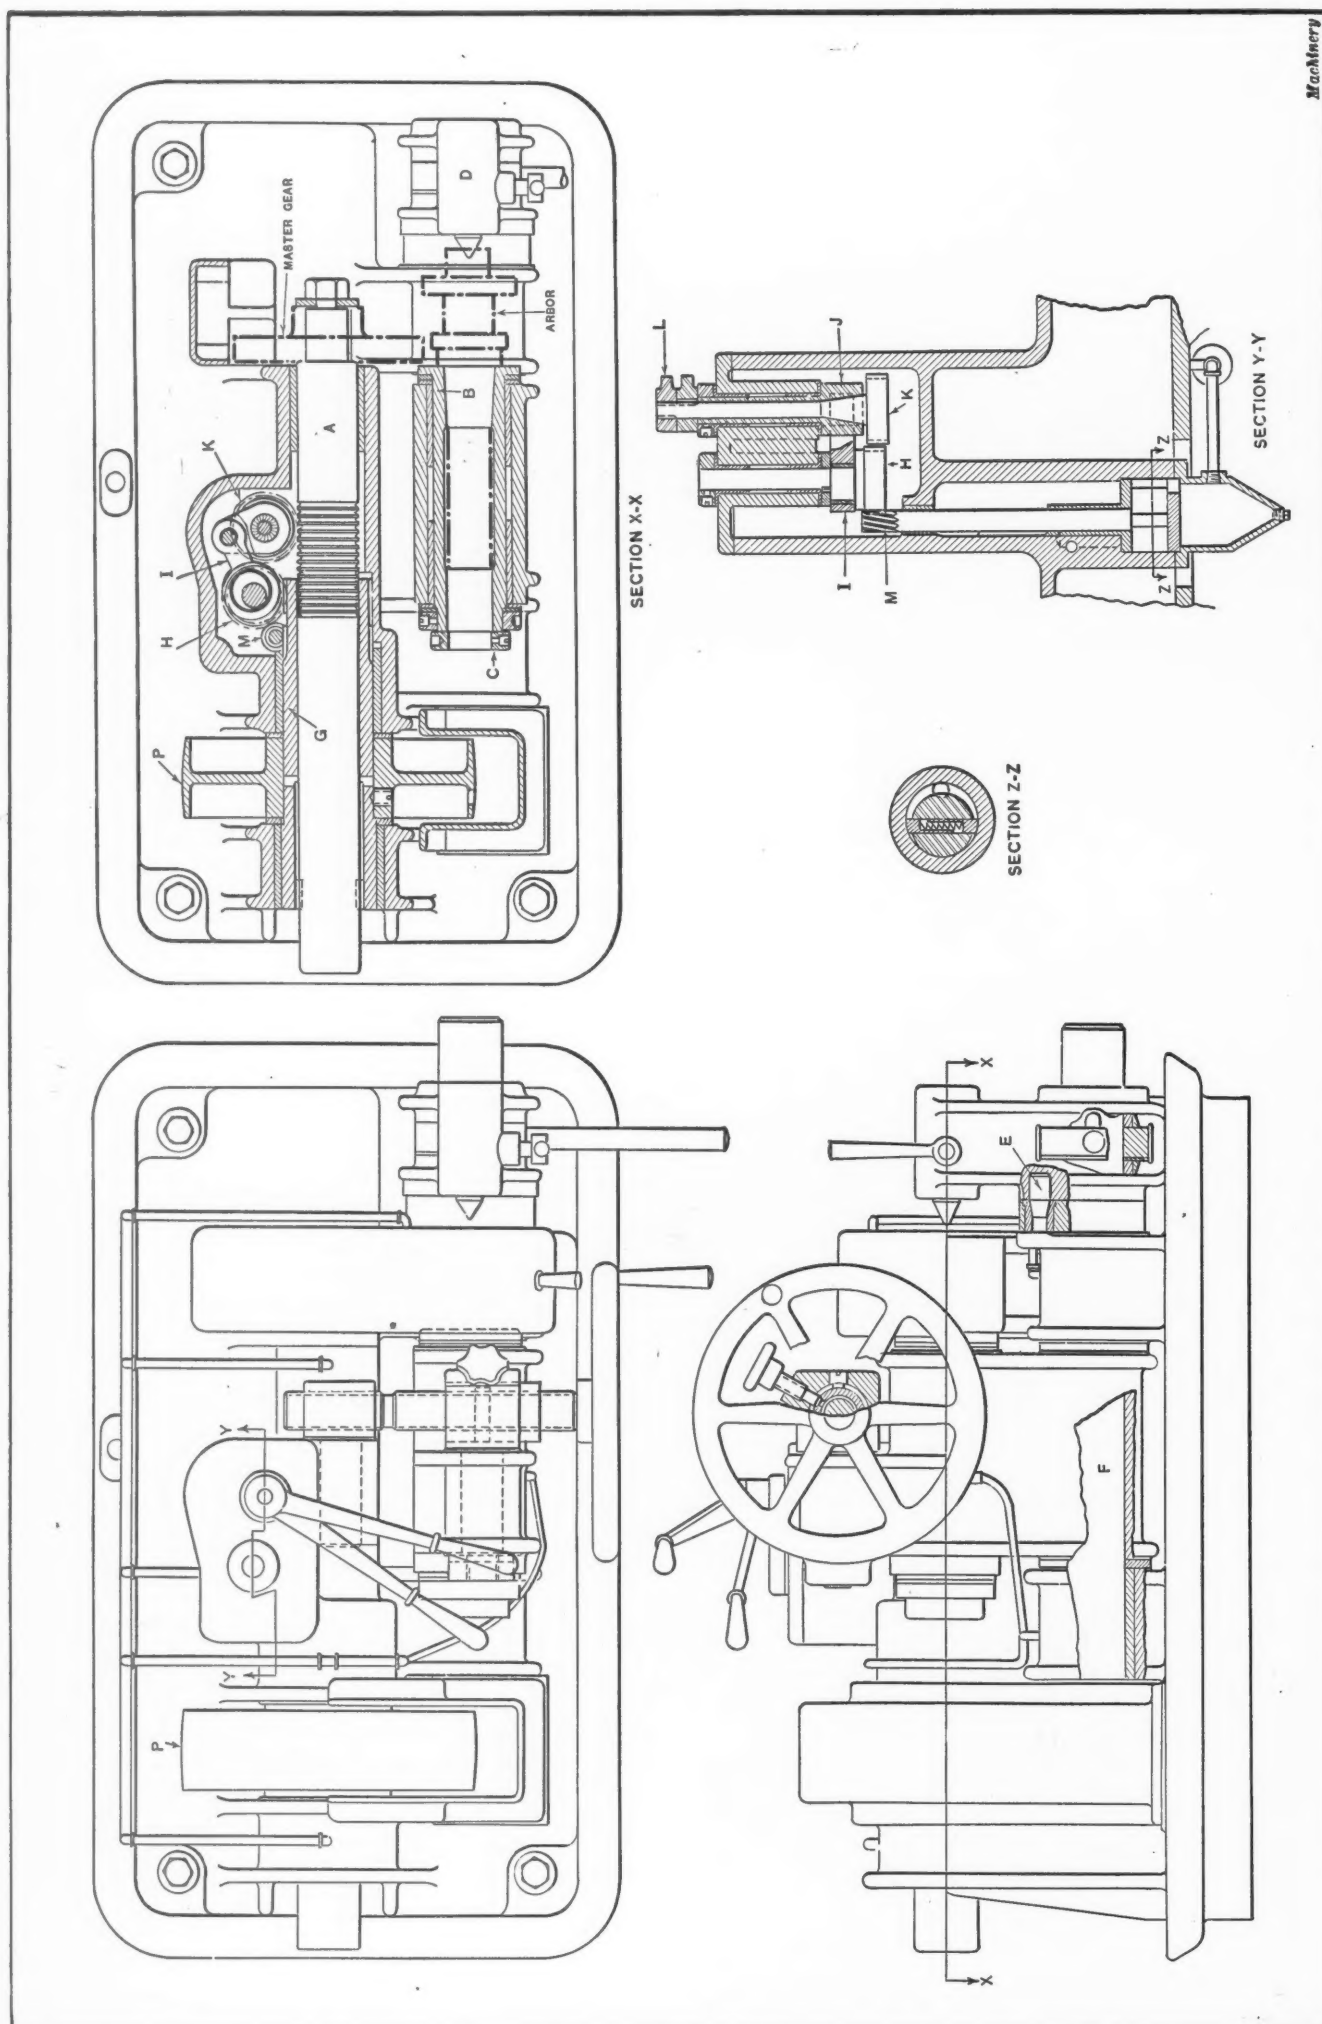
Special Machine developed for eliminating Imperfections in the Teeth of Automobile Transmission and Timing Gears by rolling them with a Master Gear
